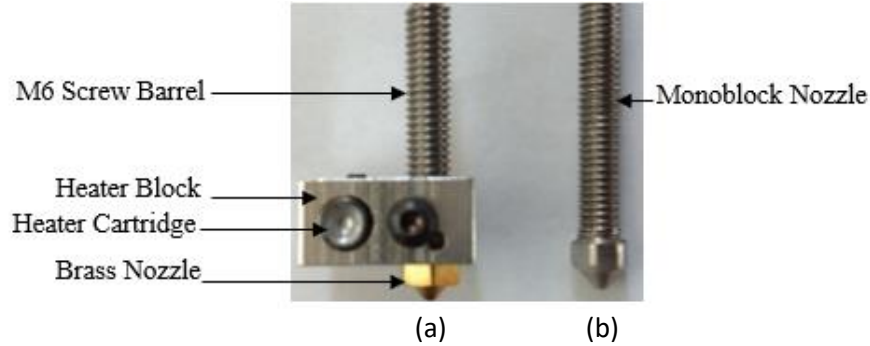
a) Standard (unmodified) extruder assembly with Stainless Steel screw barrel with heater cartridge and Brass nozzle, b) Mono-block Aluminum nozzle instead of using screw barrel and nozzle assembly
